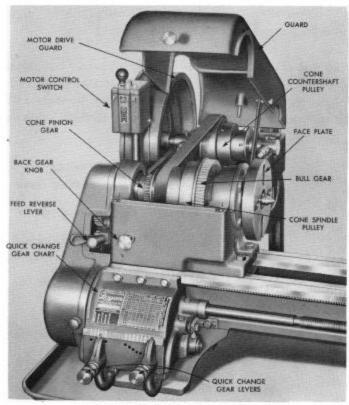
HEADSTOCK AND COUNTERSHAFT
